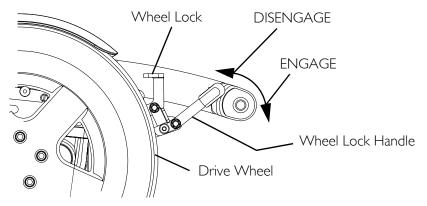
Disengaging/Engaging the Wheel locks
